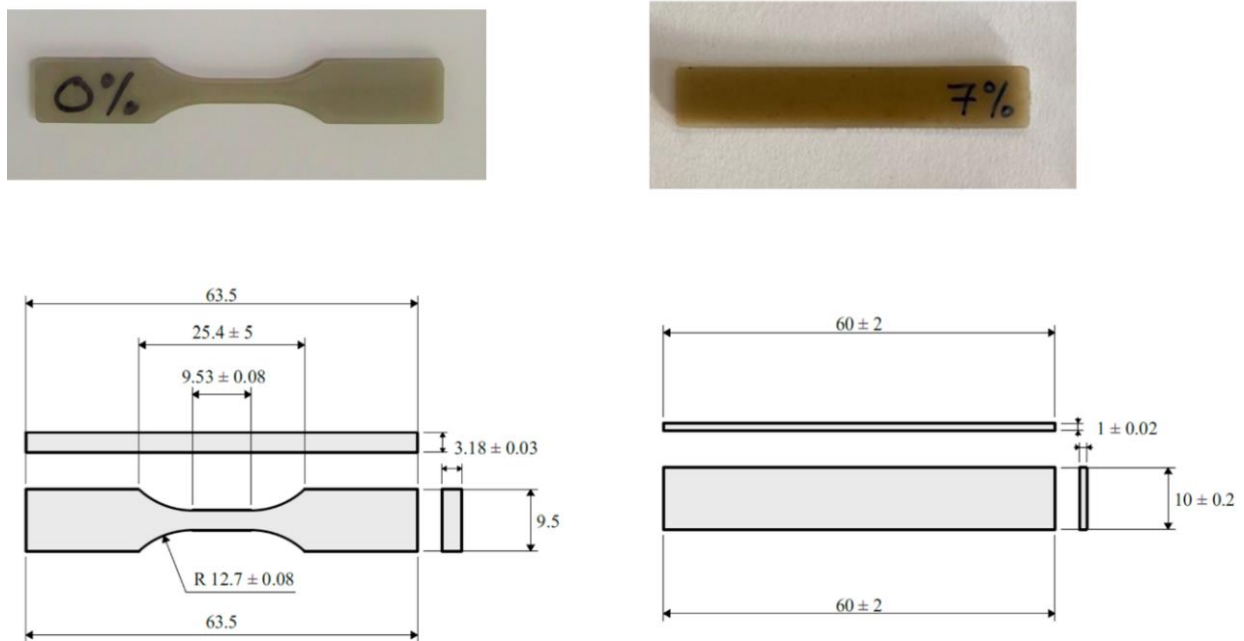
Example of the tensile (left) and flexural (right) specimens before testing (top), and specimen dimensions, in mm (bottom).
